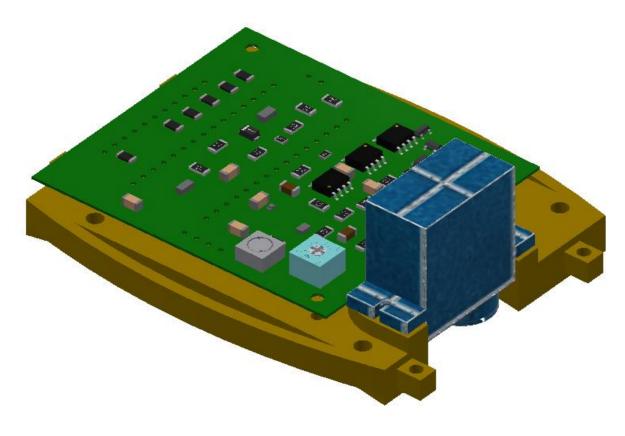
DESIGNED PCB BOARD ON HOUSING
